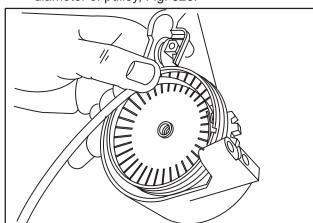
INSTALLING SPRING IN OUTER RETAINER
